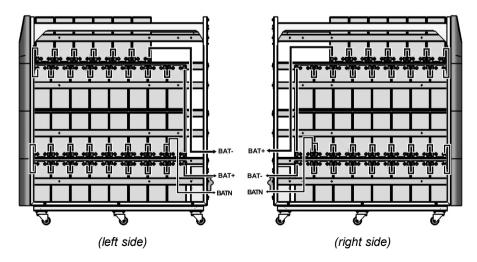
2x30 pieces of 7-9AH Battery Placement and Connections
